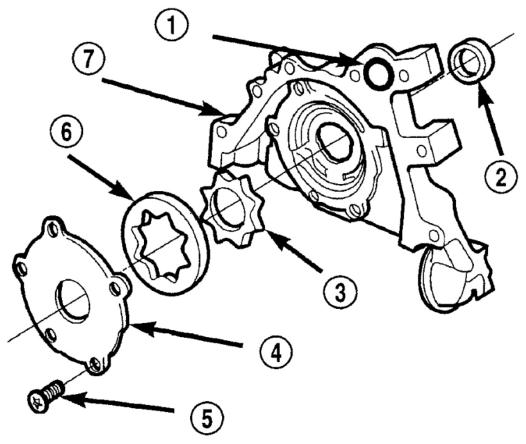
Identifying Oil Pump And Pick-Up Tube Courtesy of DAIMLERCHRYSLER CORP.
